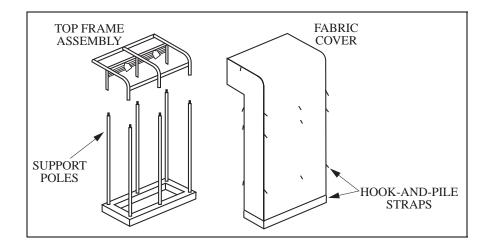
Assembly of shower top frame, support poles, and fabric cover
